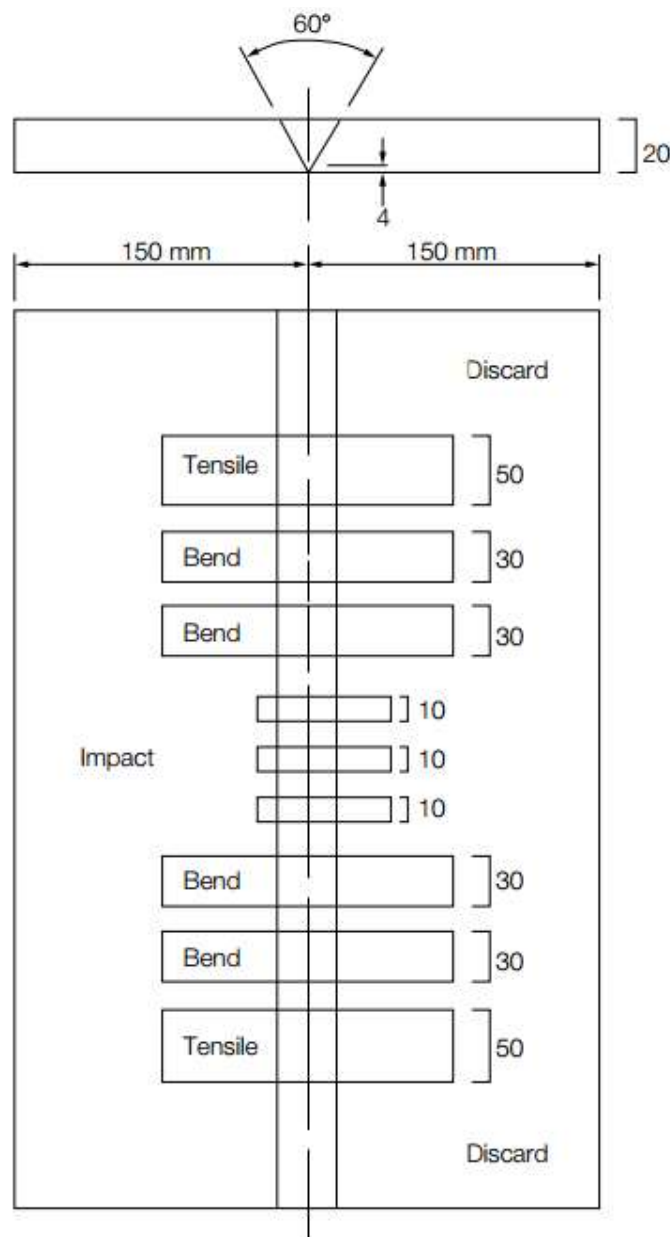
Multi-run butt weld test assembly (Submerged arc welding)
